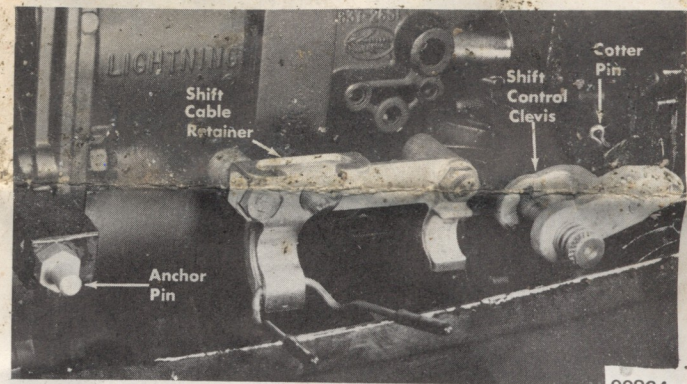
Shift Control Clevis and Shift Cable Retainer Installed
